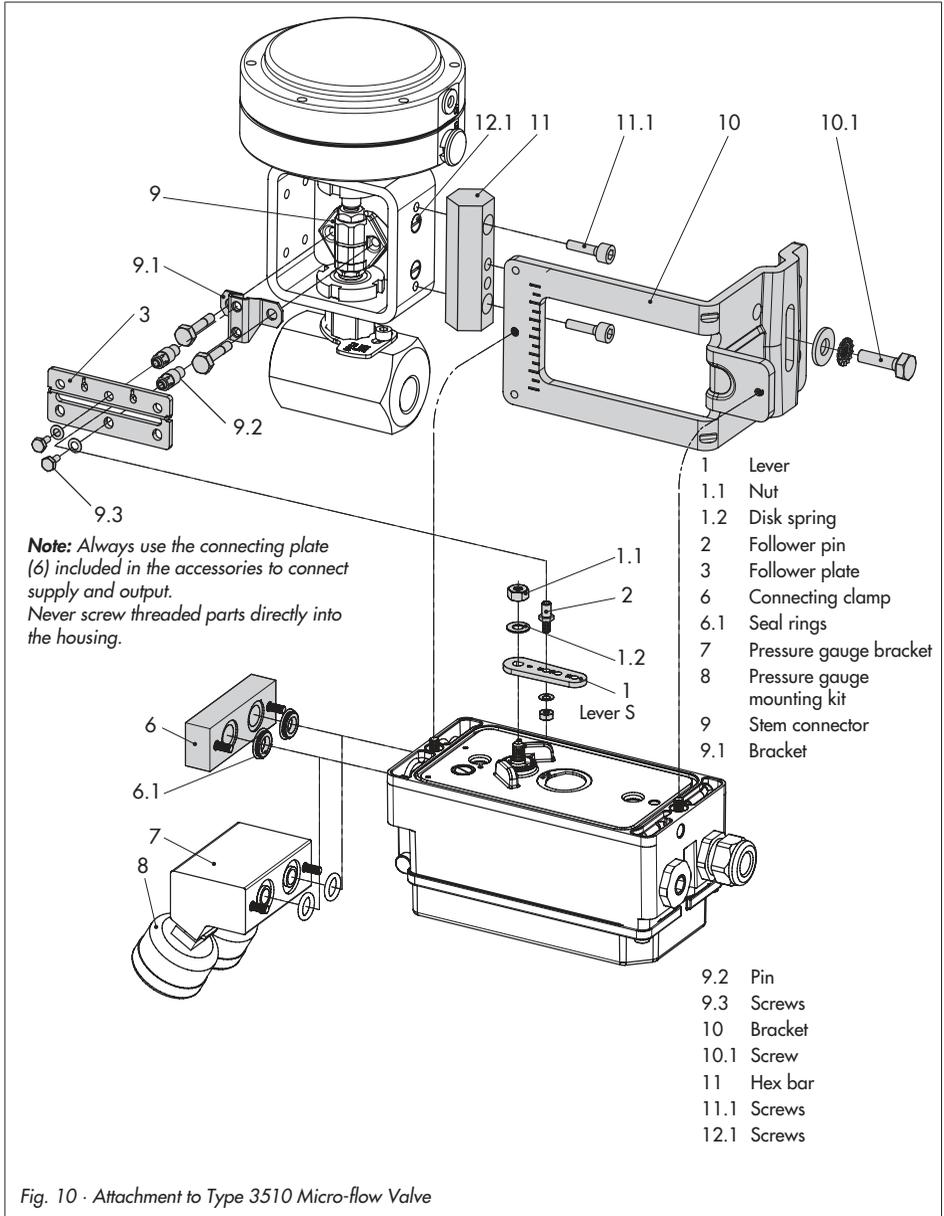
· Attachment to Type 3510 Micro-flow Valve
